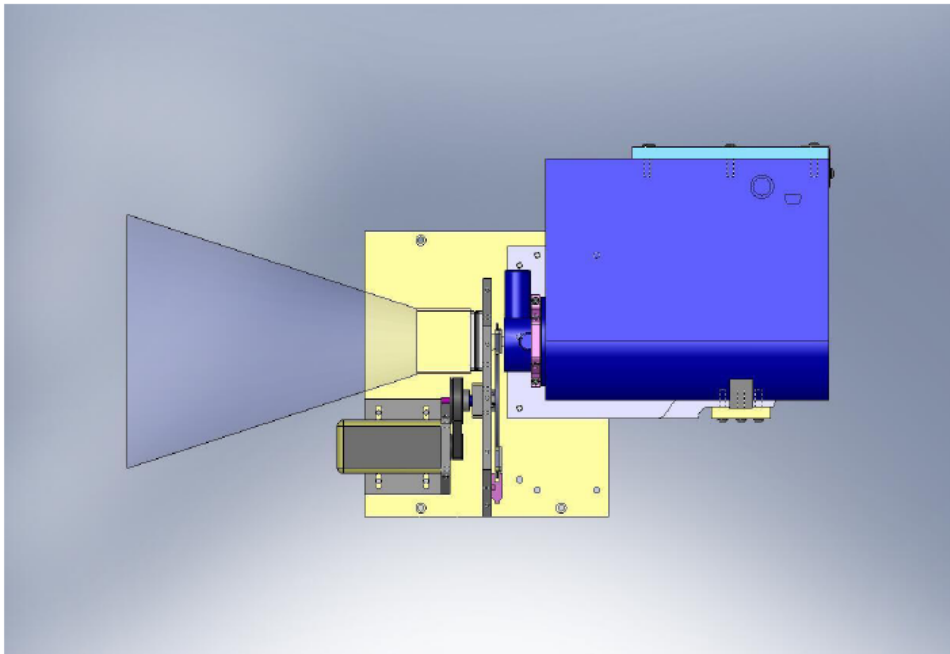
Kevex Mounting Assembly w/ Shutter (Front View)
